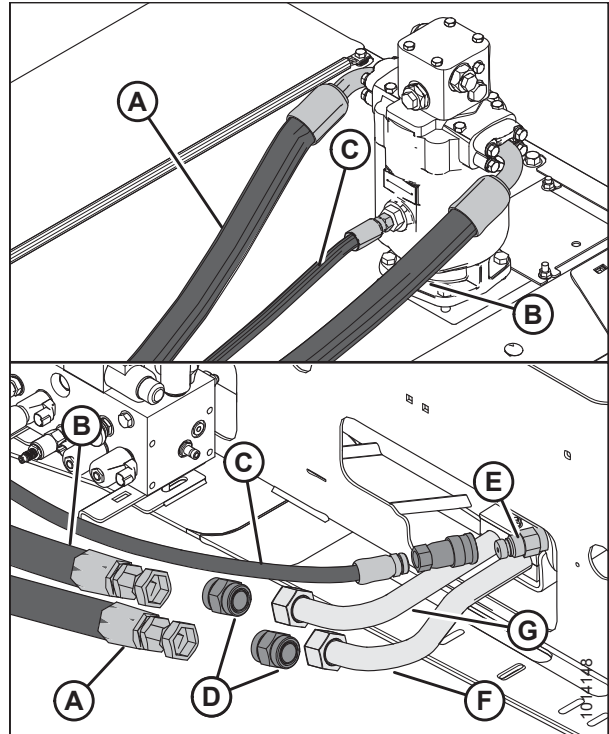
Hydraulic Couplers with Case Drain Hose
